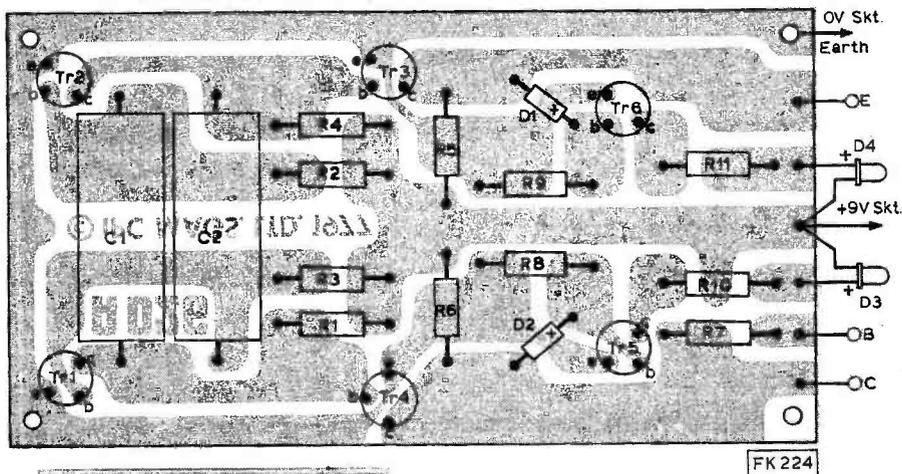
above, is the printed circuit board, copper side, shown full size. Fig. 3: below, is the layout of the components on the PCB.
